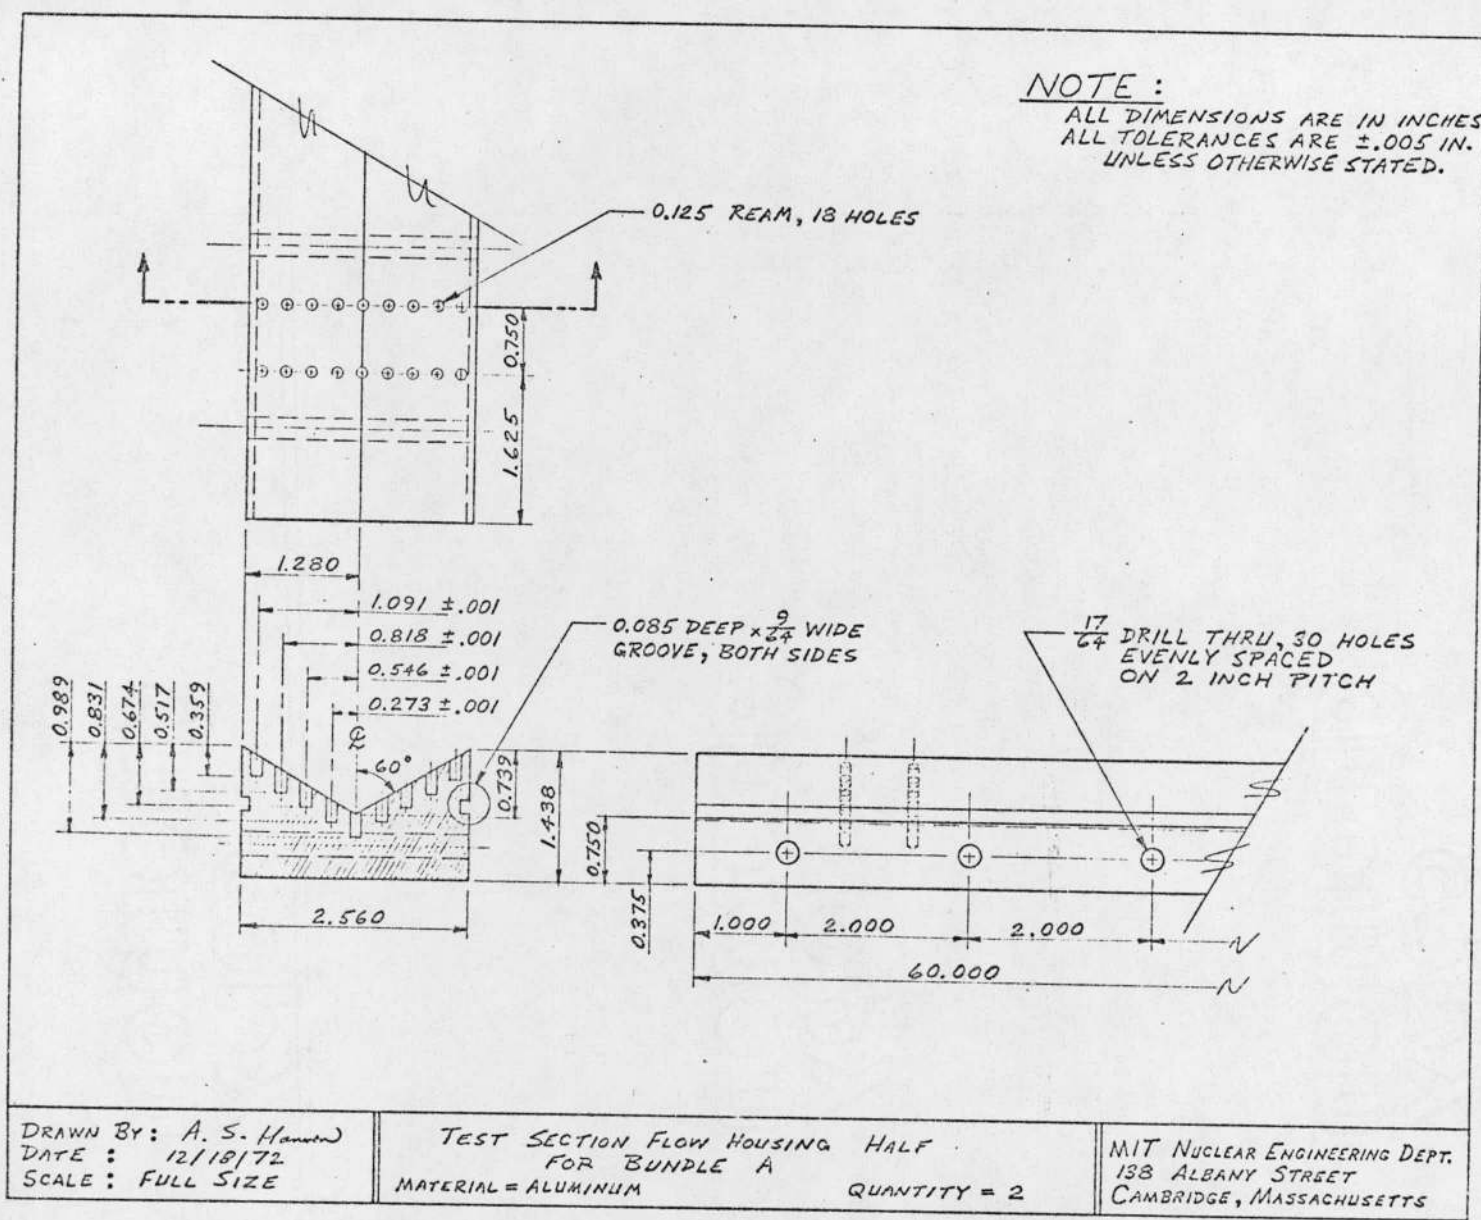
CONSTRUCTION DETAILS OF THE HEXAGONAL FLOW HOUSING
